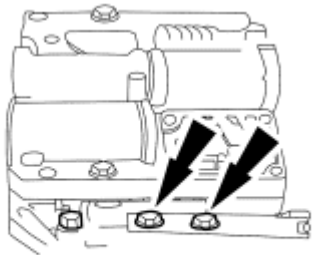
Accumulator Body-To-Transfer Plate Bolts
